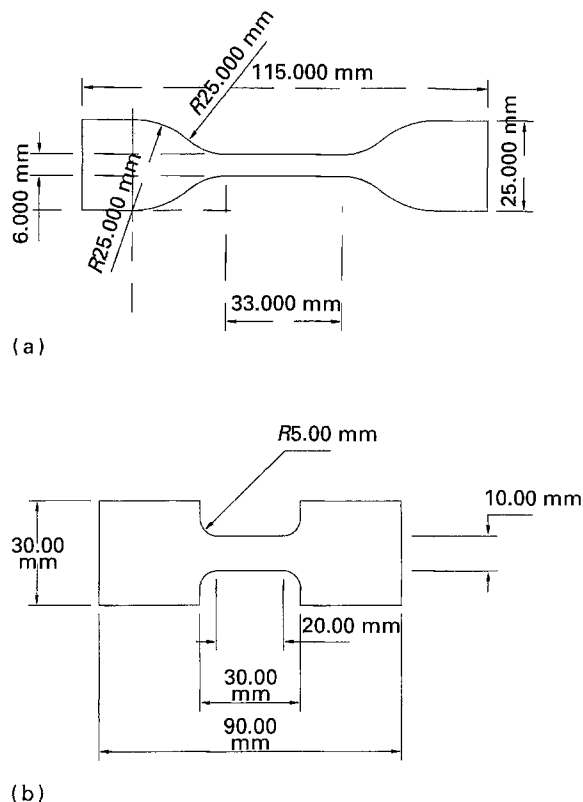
Geometries of specimens used in the current work. (a) ASTM die C geometry used here for elastomers; (b) 20 mm gauge length specimen.
